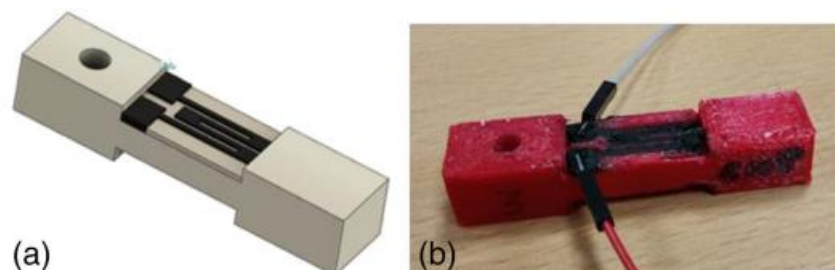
CAD model and actual 3D printed sensor integrated with a strain gauge [13]
